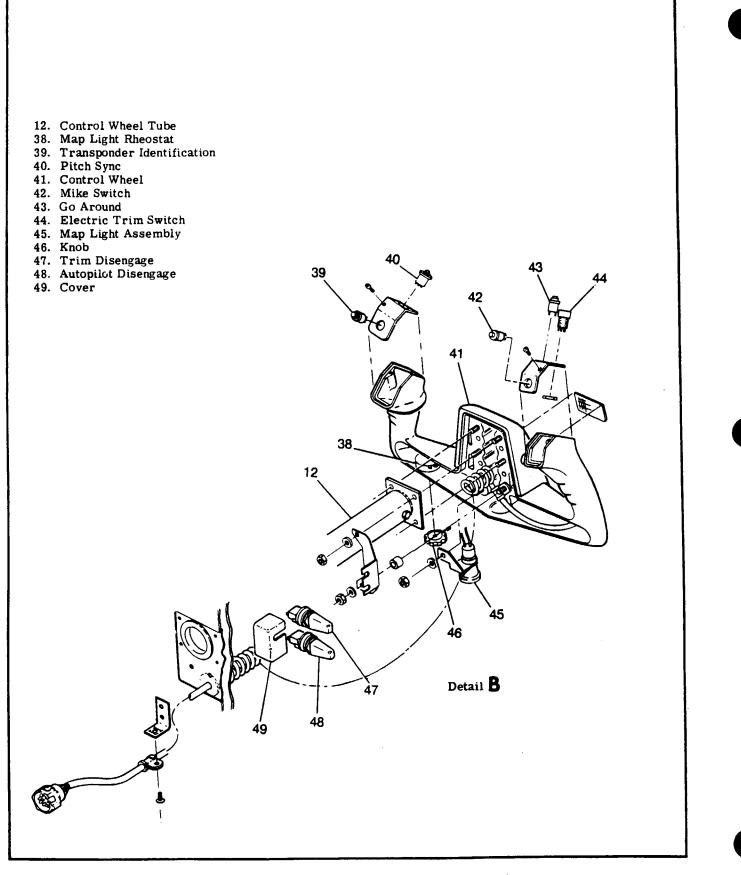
Control Column Installation (Sheet 3 of 3)
